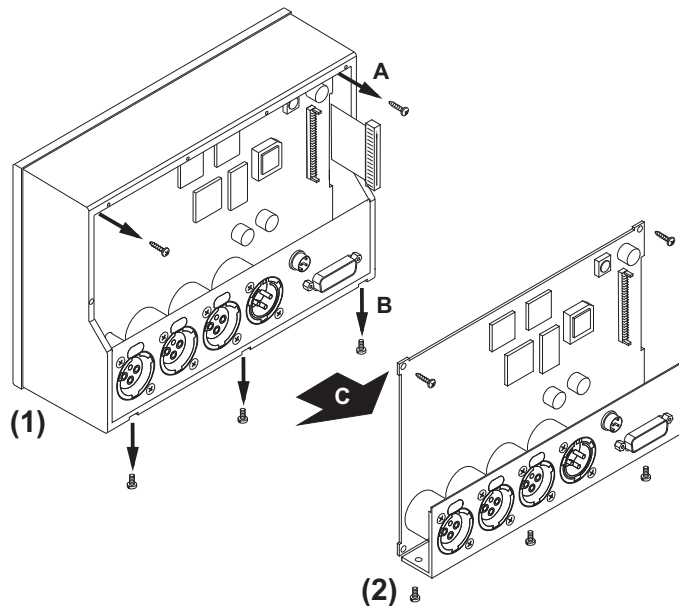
Unscrew and removal of connector panel and main pcb
